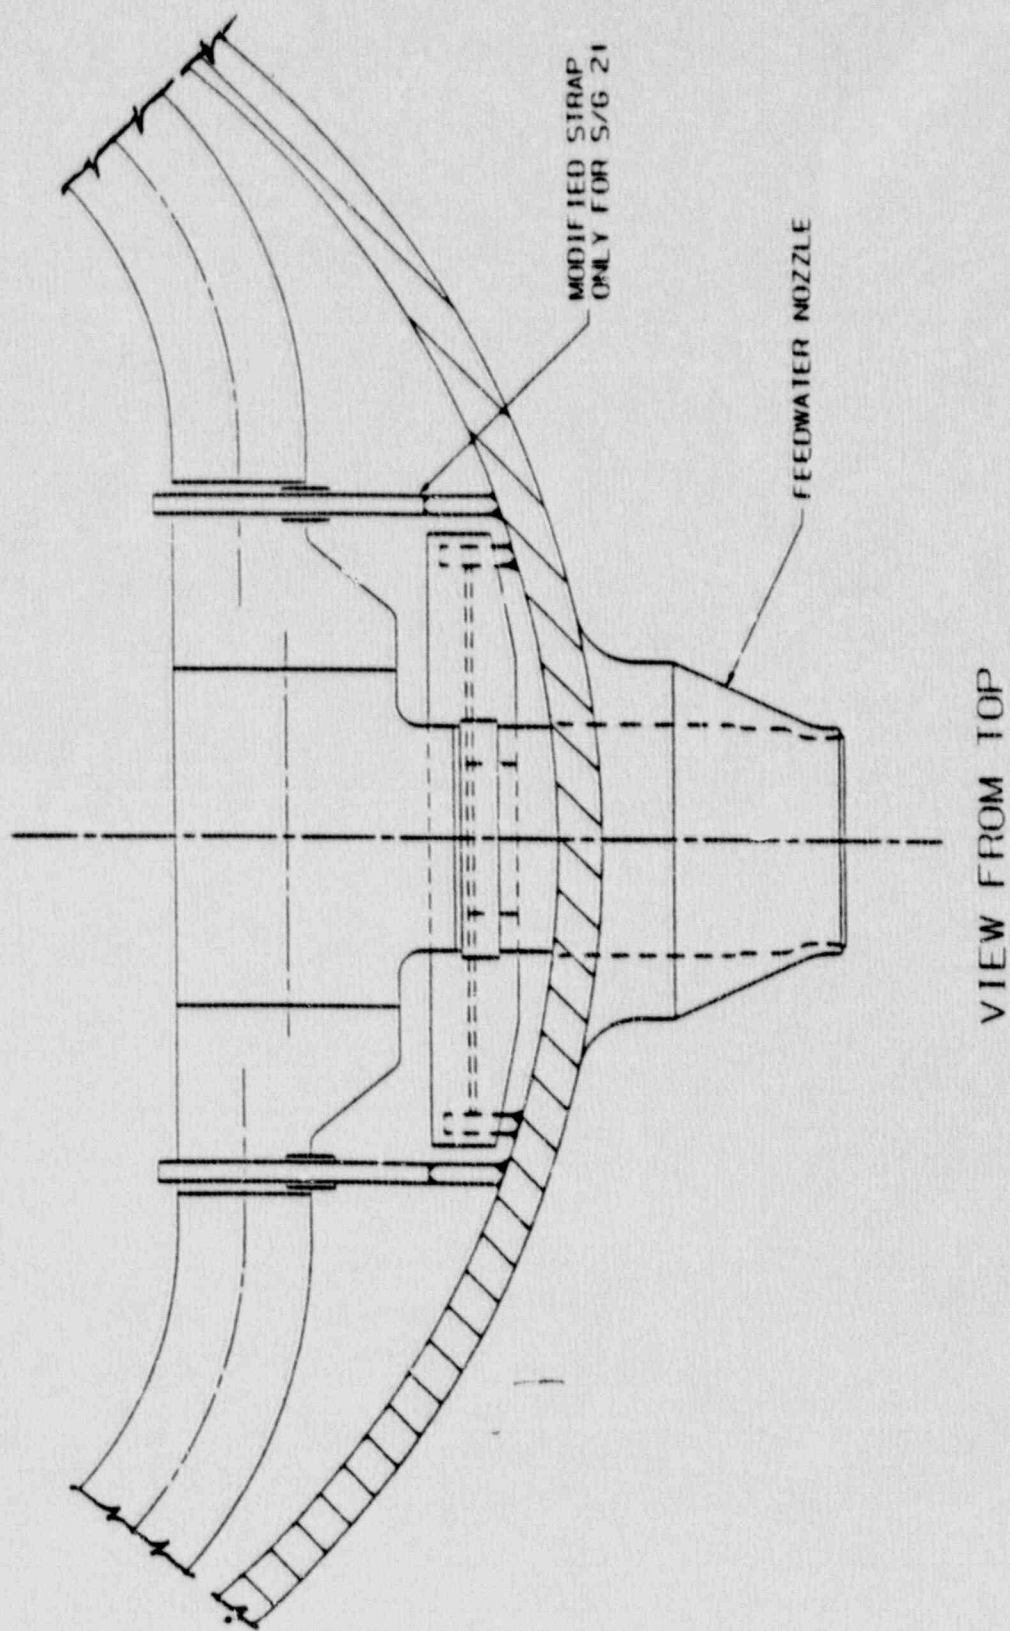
PLAN VIEW OF MODIFIED/RELOCATED BRACKET SUPPORT
